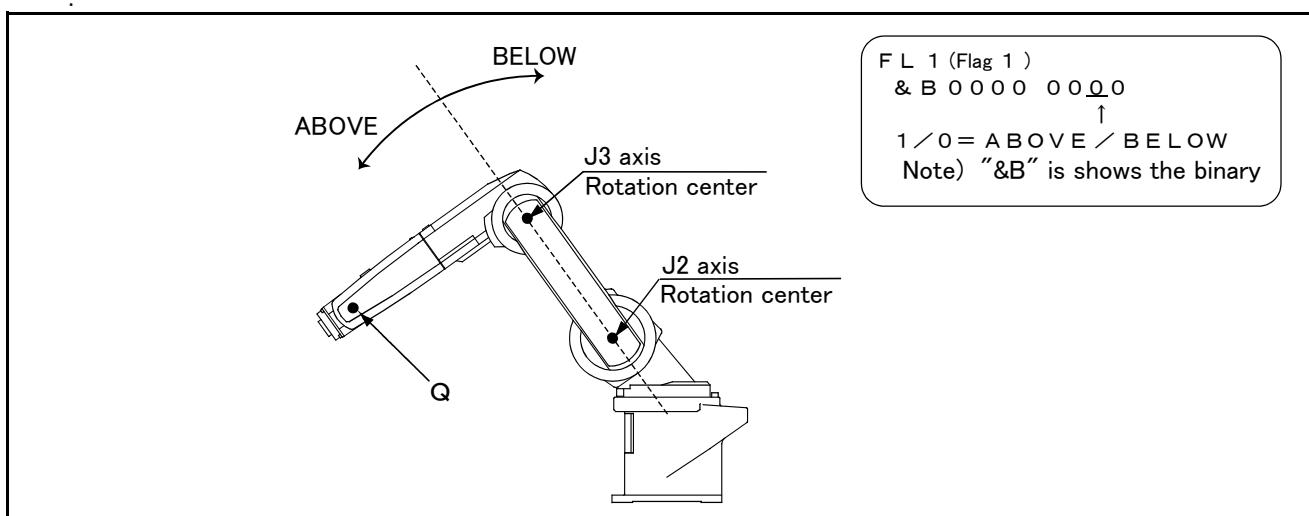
Configuration flag (ABOVE/BELOW)
